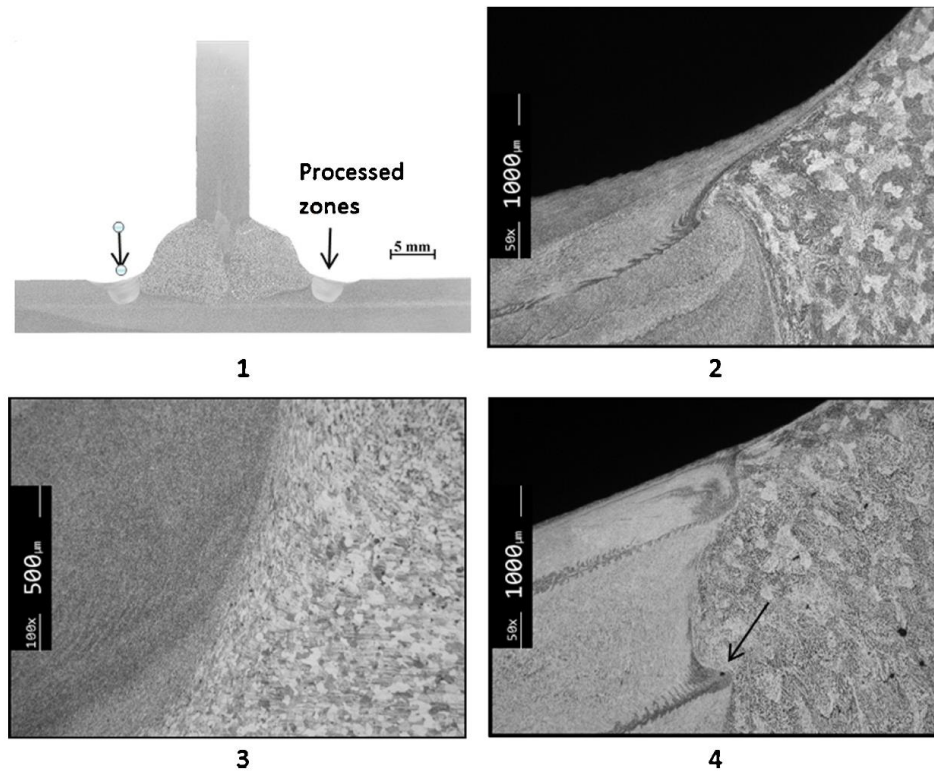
MIG welds made on AA 5083-H111 and processed with: tool E: (1) macrograph; (2) toe region; (3) nugget; and (4) with tool C: toe region.
